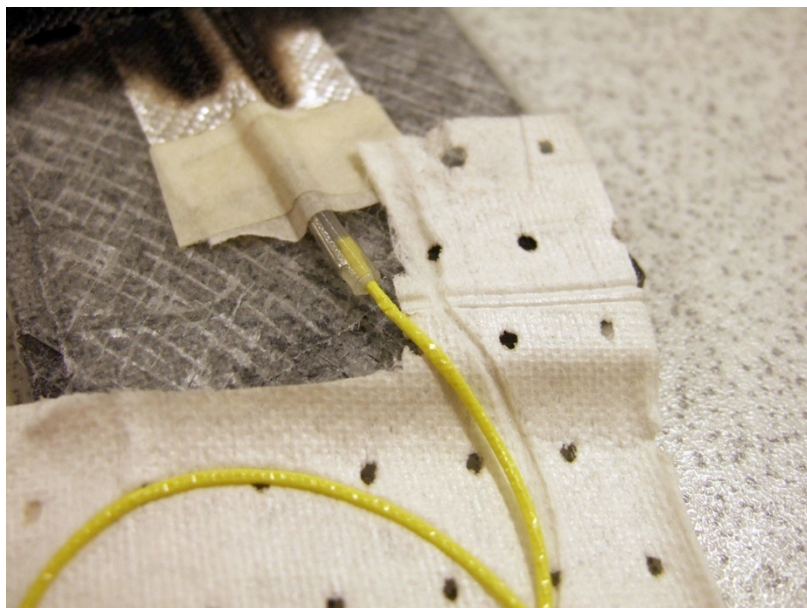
Detail picture of fibre exiting the relaxation test specimen.
